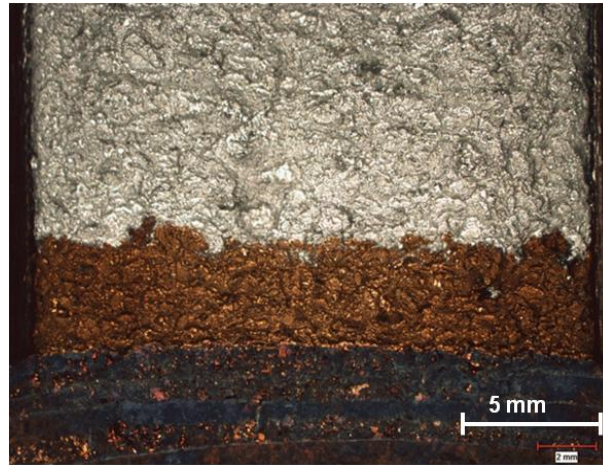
Fracture surface of a 25.4 mm thick side-grooved specimen [81]
